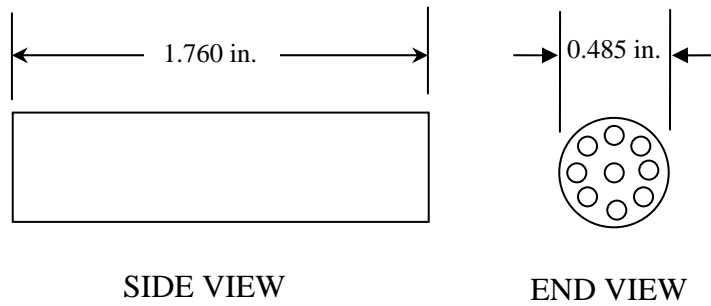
Sketch of nail forging turned to diameter for drill life testing on 2X gundrill. End view shows nine holes that were placed in the work piece.
